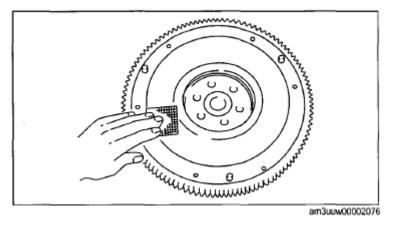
Removing Slight Scratches And Discoloration Using Sandpaper
